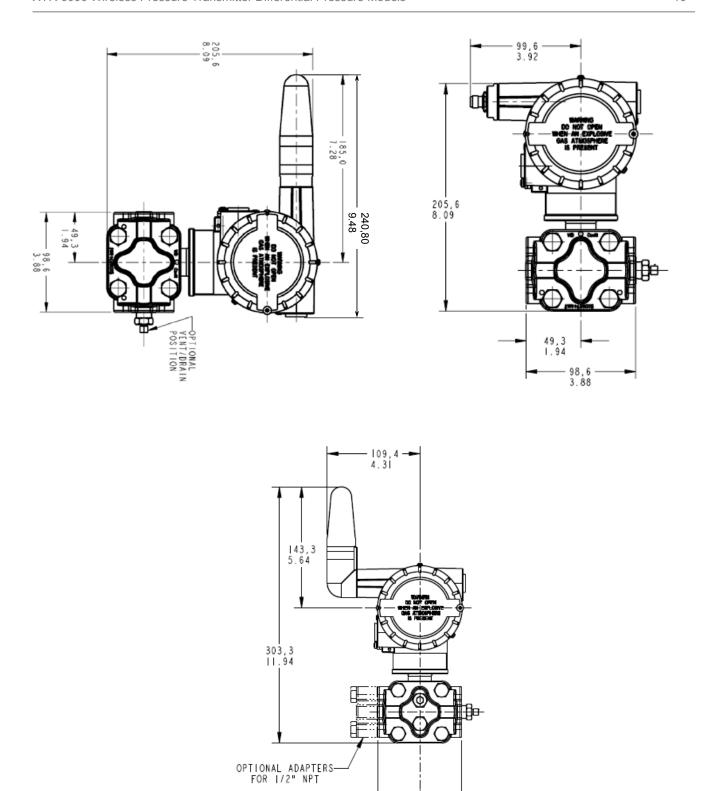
Typical mounting dimensions for STDW924, STDW930 and STDW974 (rear view)
